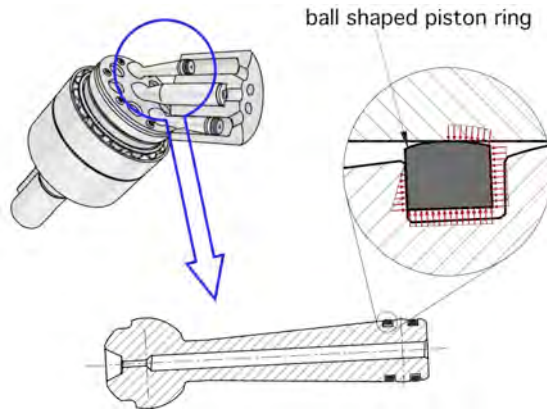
Spherical piston rings as applied in a bent axis machine.
